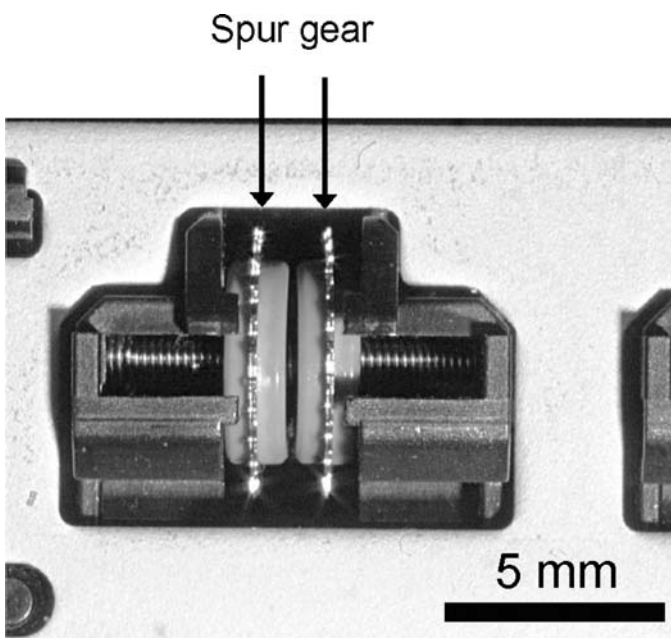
A set of spur gears supported by shafts and holders on the same metal plate.
